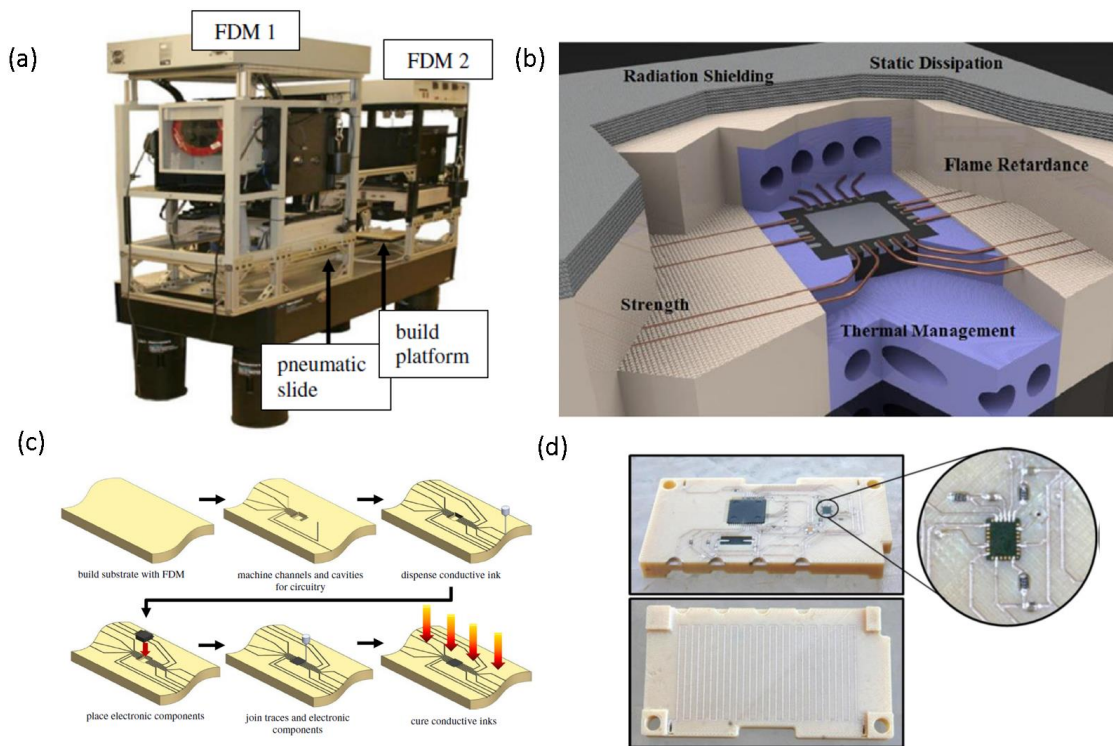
(a) The photography of mylti^{3D} system and (b) schematic of fabrication example. (c) Process steps for fabrication of 3D printed CubeSat module. (d) 3D printed CubeSat module by FDM, CNC routing, and dispenser. Reprint with permission from ref. [93].
